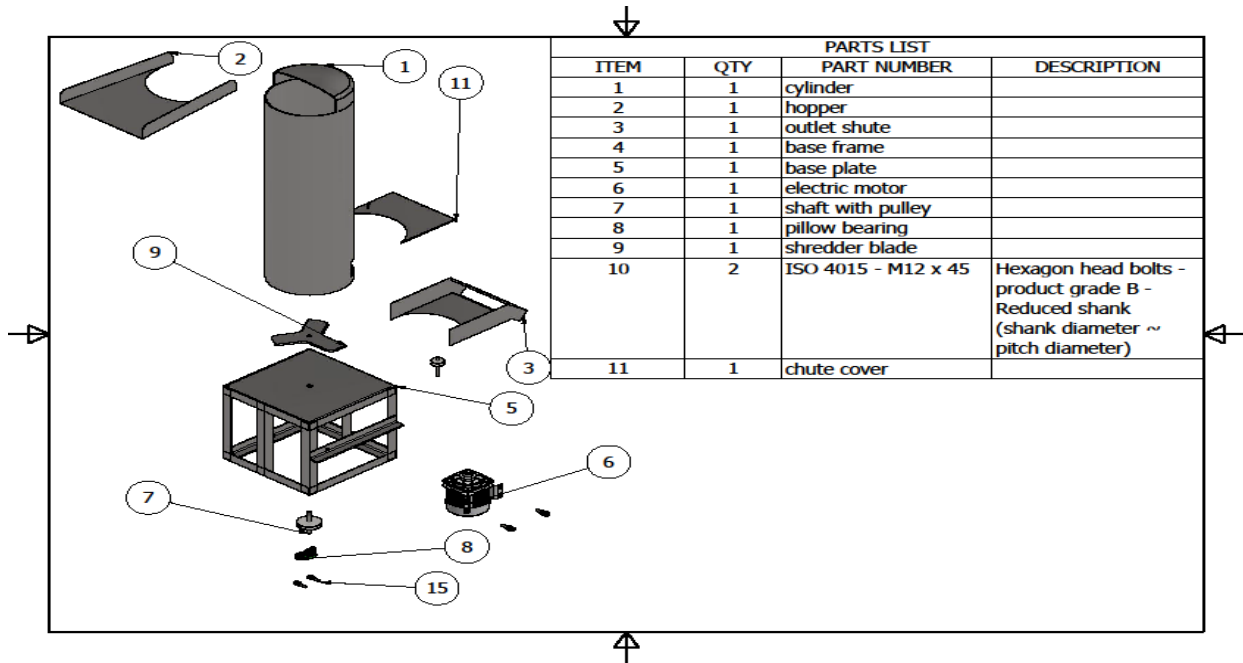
Exploded view of the prototype agricultural waste shredding machine.
